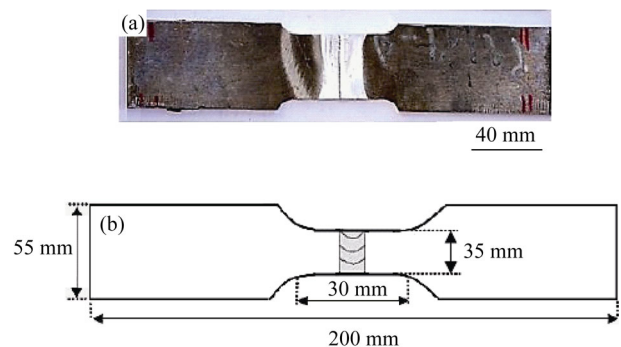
(a) Shape and (b) size of the tensile test samples prepared from welds in this study.
